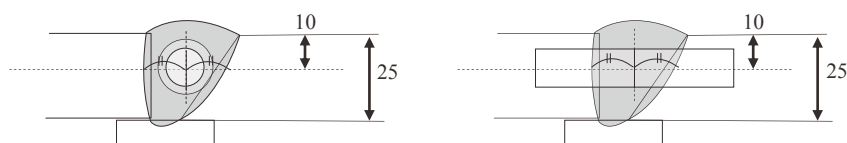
Position of tensile test of weld metal and charpy impact test piece in cross section
